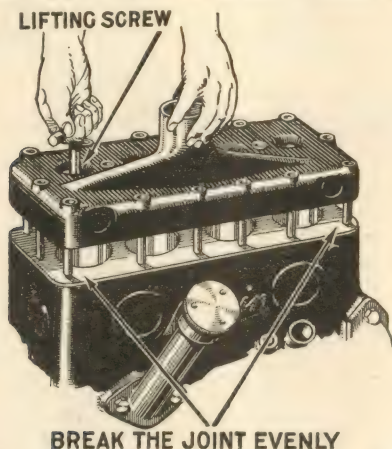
LIFTING THE AUSTIN CYLINDER HEAD
